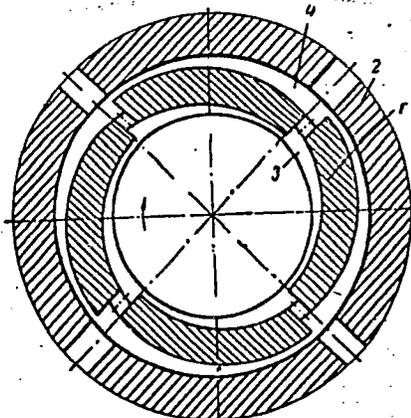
1 - floating bushing; 2 - bed of the bearing; 3 - internal wedge-shaped oil recesses; 4 - external wedge-shaped oil recesses
